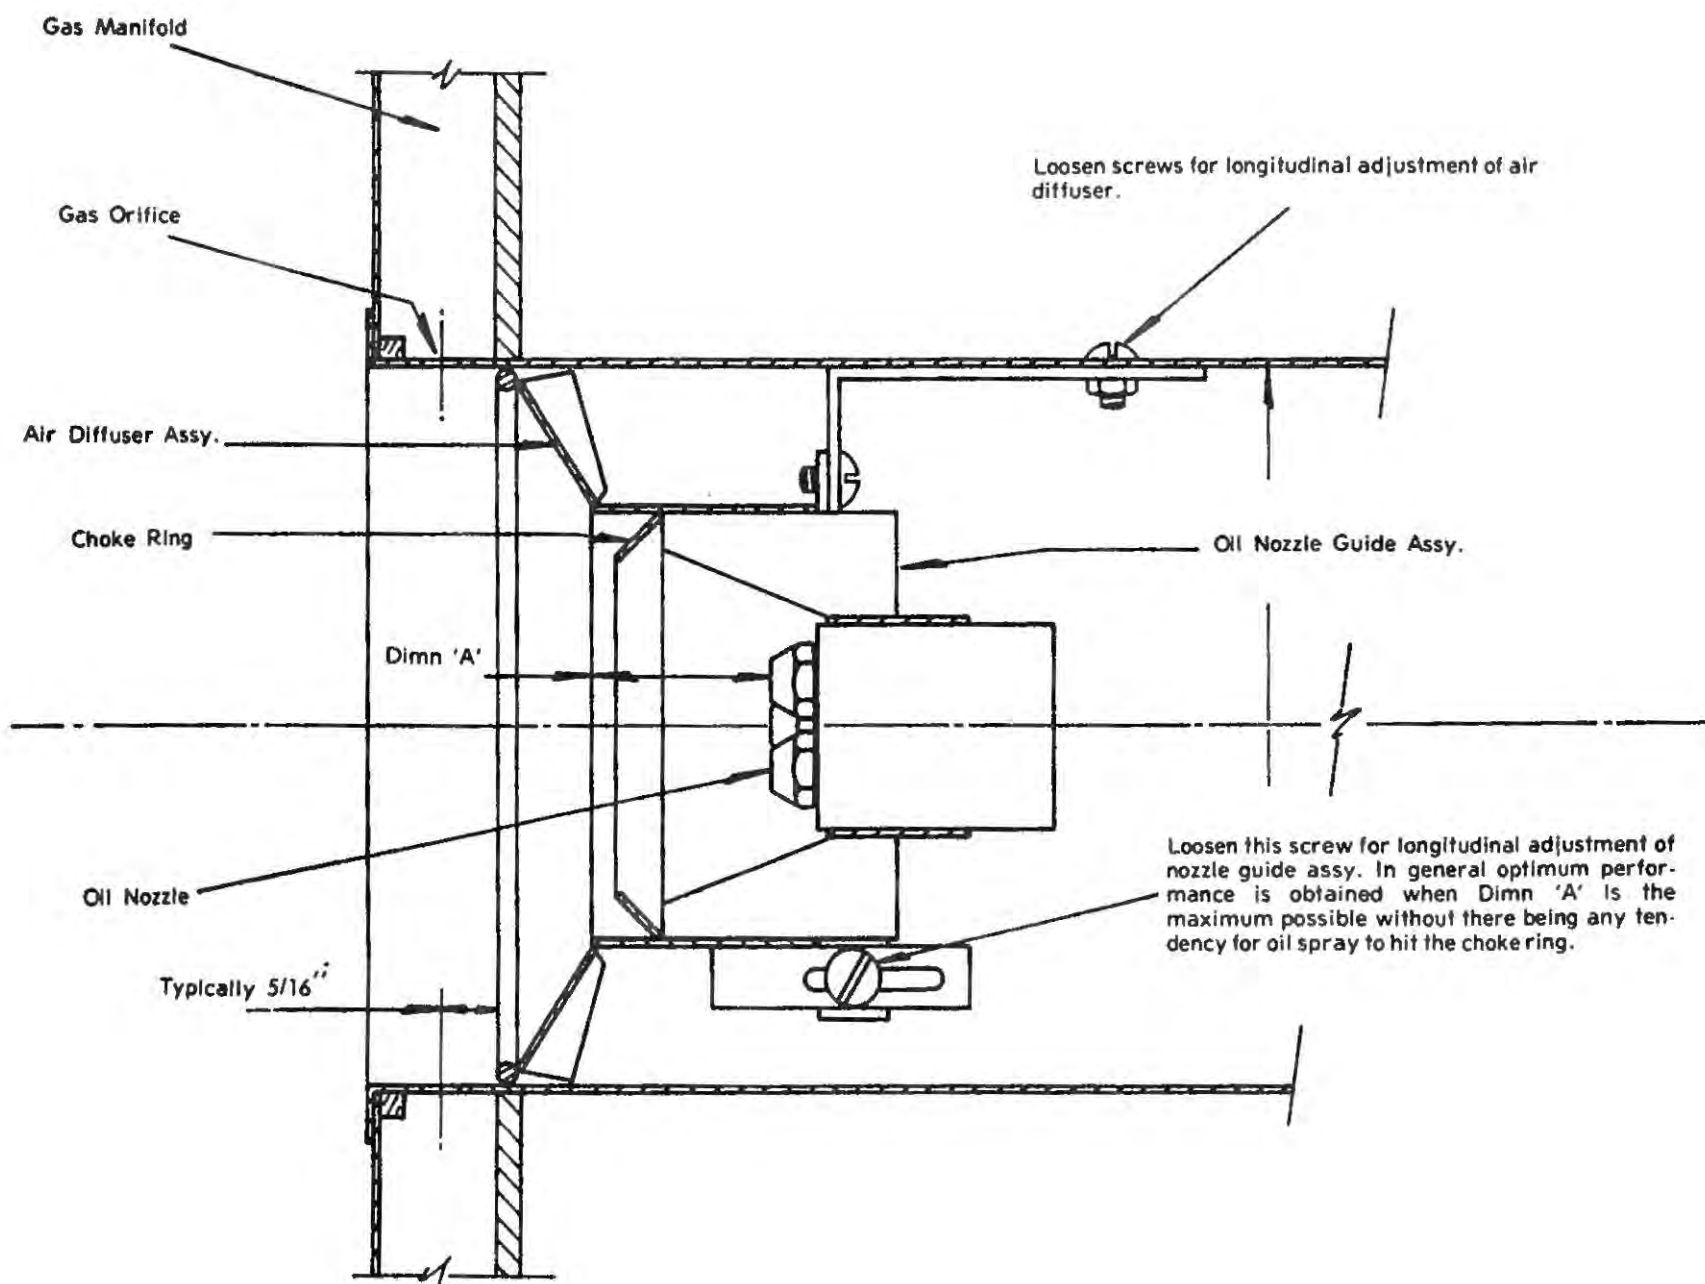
TYPICAL FIRING HEAD ADJUSTMENTS - BURNERS 60 THRU 80 HP.
